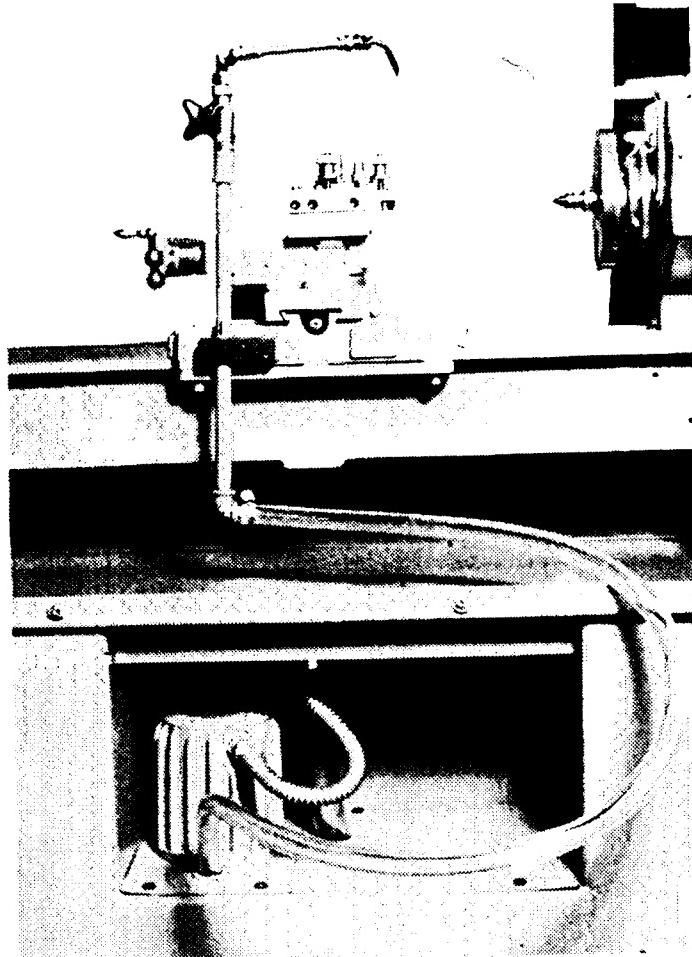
Rear View of Cabinet showing pump and fittings (Rear splash guard removed)
